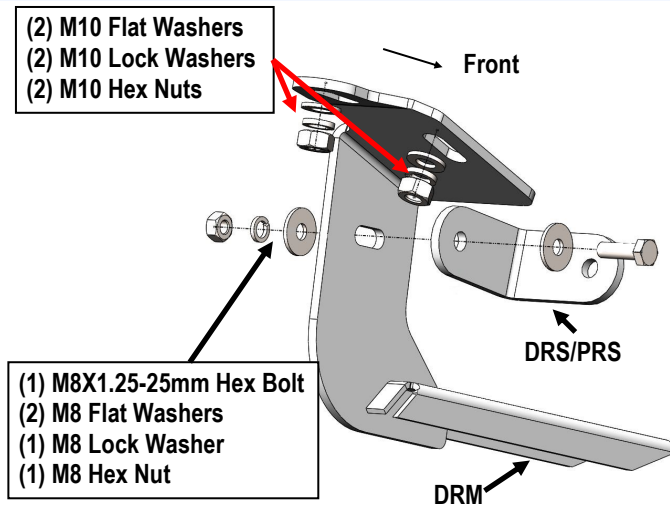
Driver Rear Mounting Bracket (DRM) Installation
